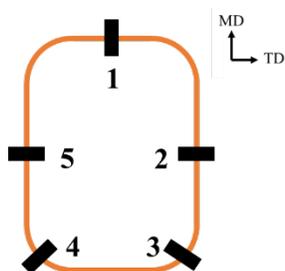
Five welding locations. Black lines correspond to welding samples (1-5). Orange lines correspond to welding.
